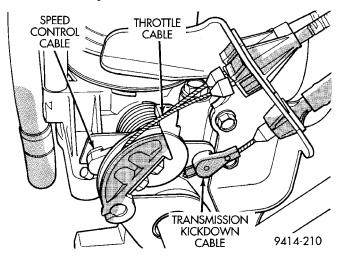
Throttle Cable Attachment to Throttle Body—Automatic Transmission
